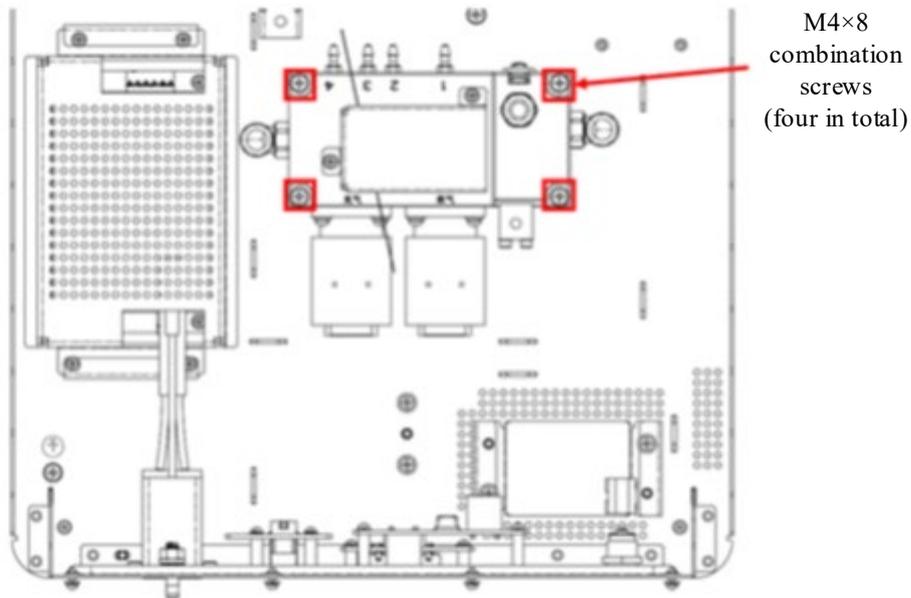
Disassembling the Pressure Relief Valve Assembly
